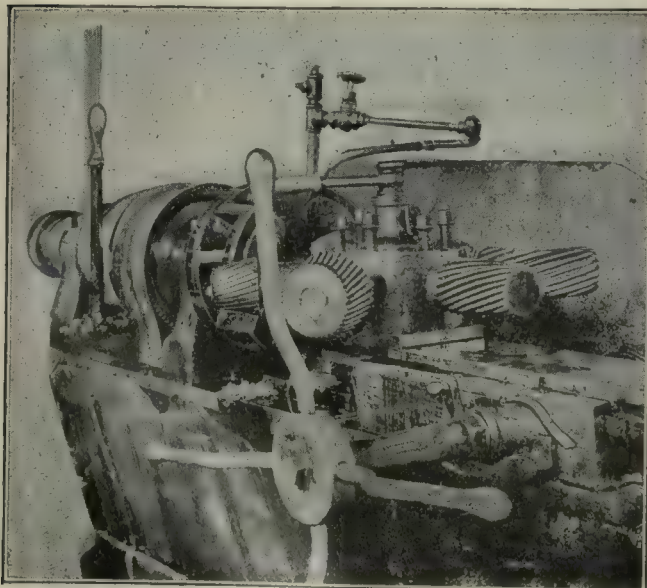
TAPER-REAMING AND CHASING THREAD OF ADJUSTABLE DIES
